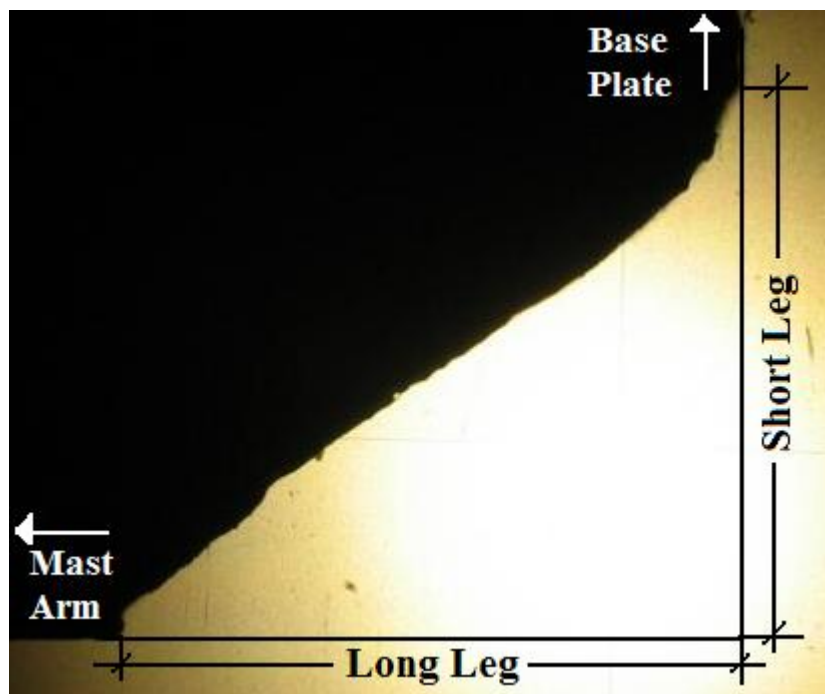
Typical Weld Leg Locations
